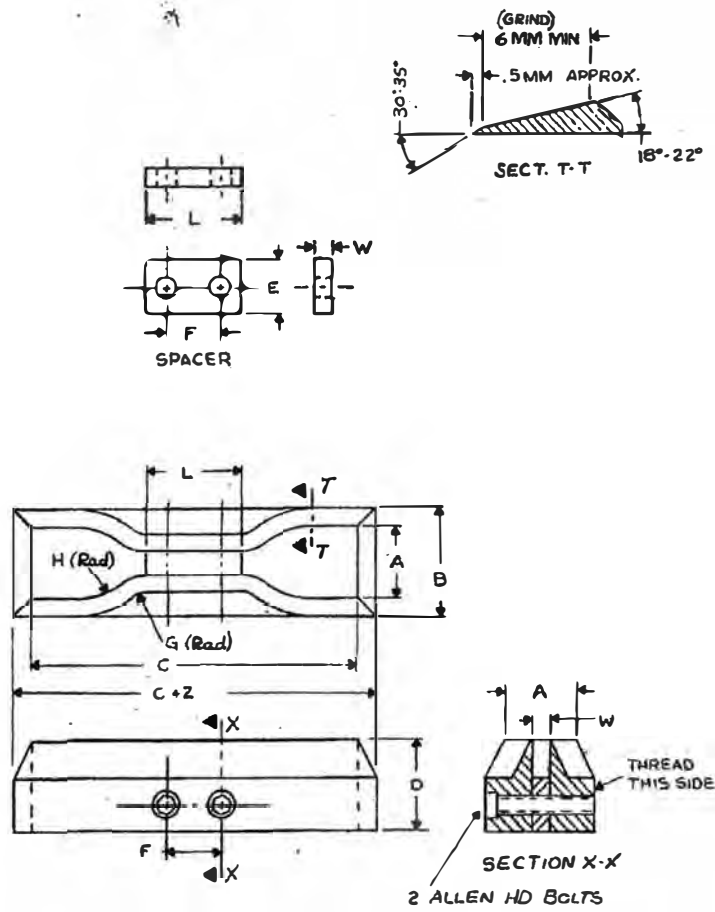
Standard Dies for Cutting Dumbbell Specimens (continued)
